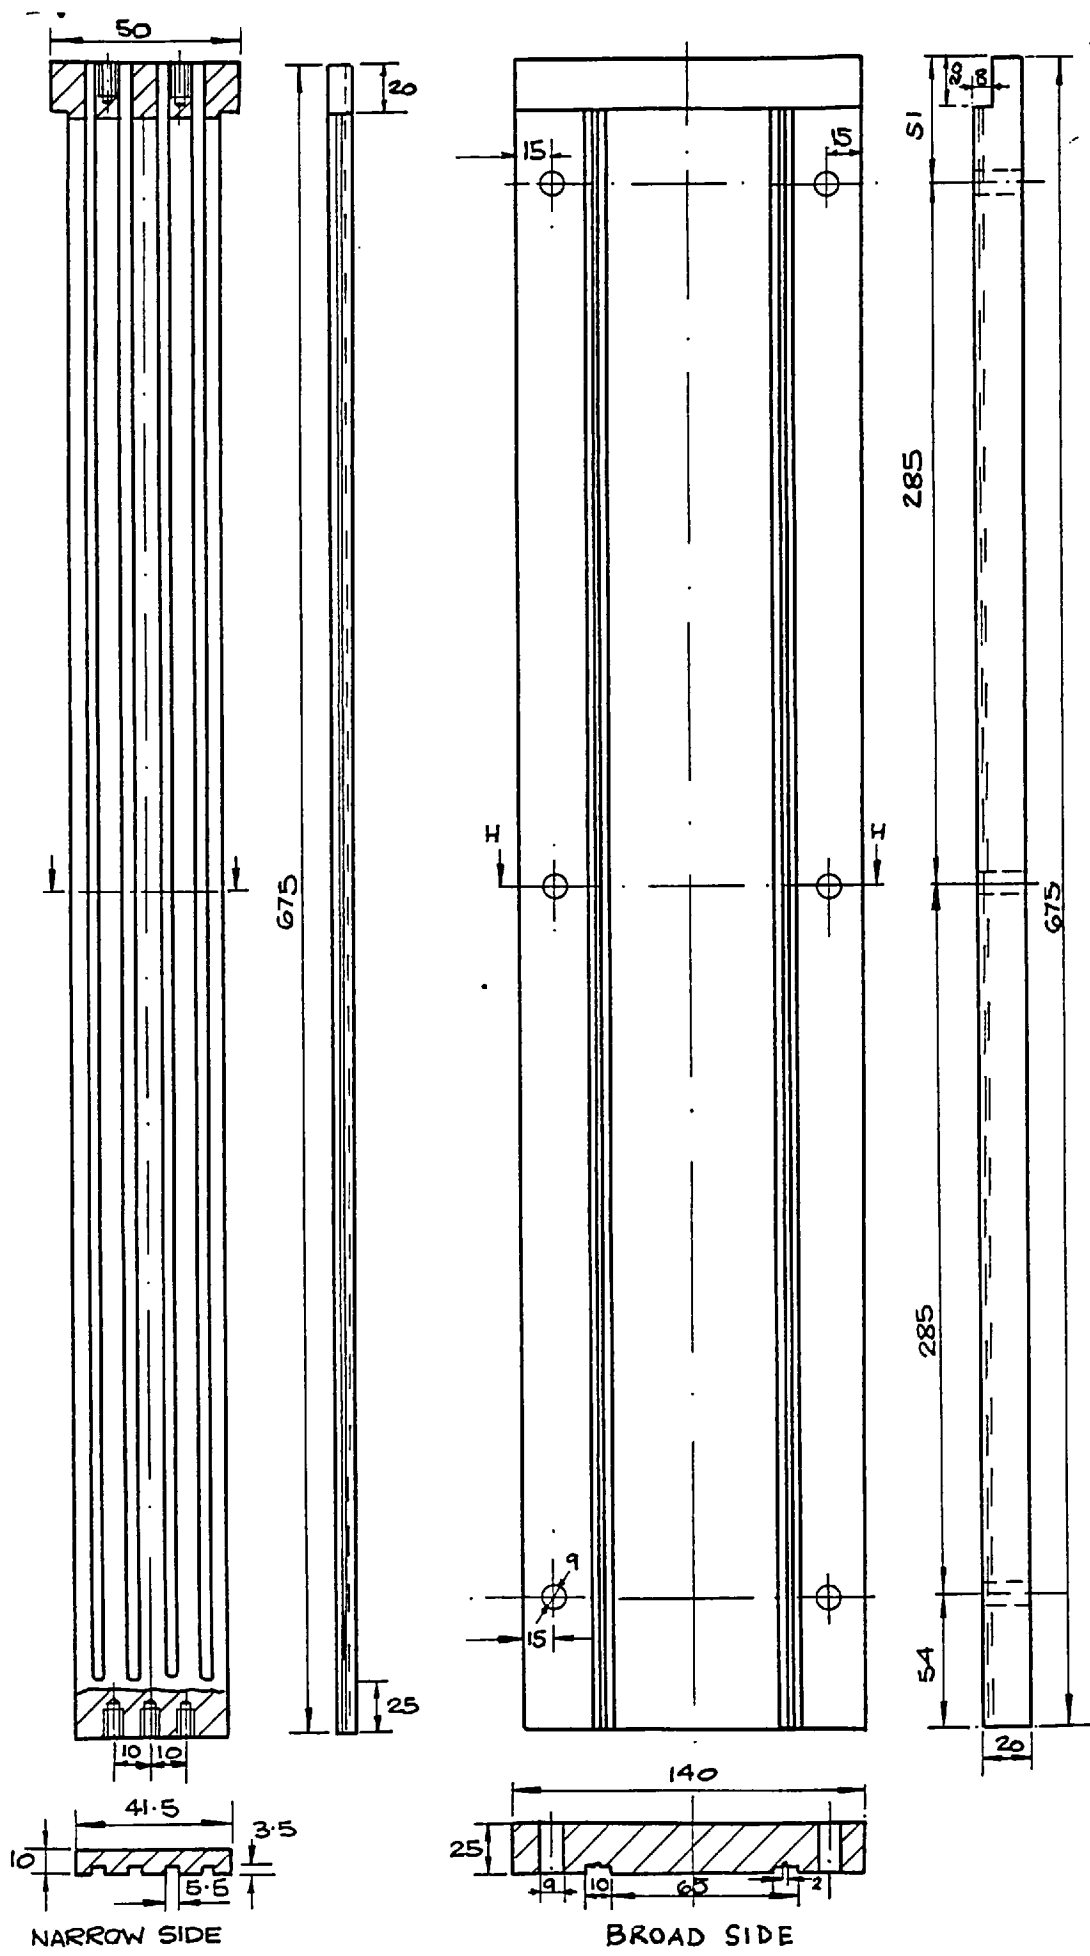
SIDE WALLS OF THE TEST SECTION
